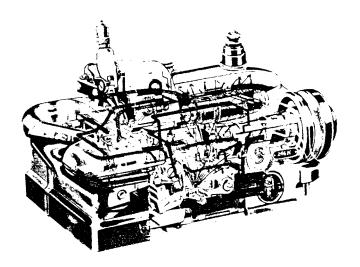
X-ray View of Class 246K Machine (Lubricating System Shown in Solid Black)
